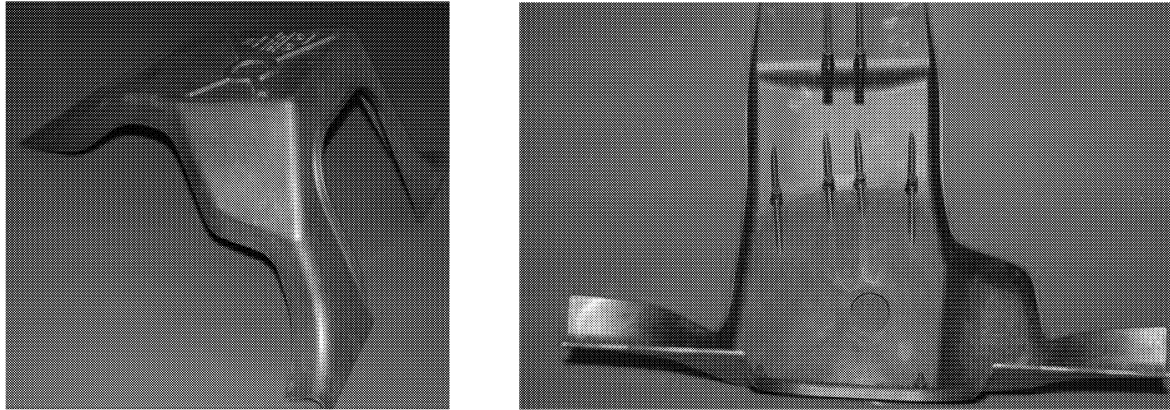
Super-vacuum die casting magnesium shock tower [30].
